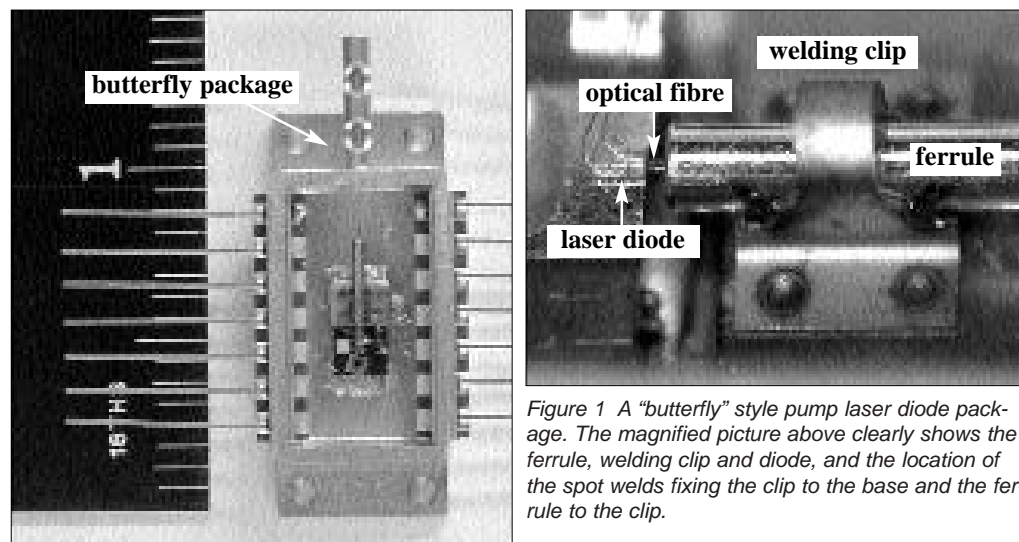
A "butterfly" style pump laser diode package. The magnified picture above clearly shows the ferrule, welding clip and diode, and the location of the spot welds fixing the clip to the base and the ferrule to the clip.
